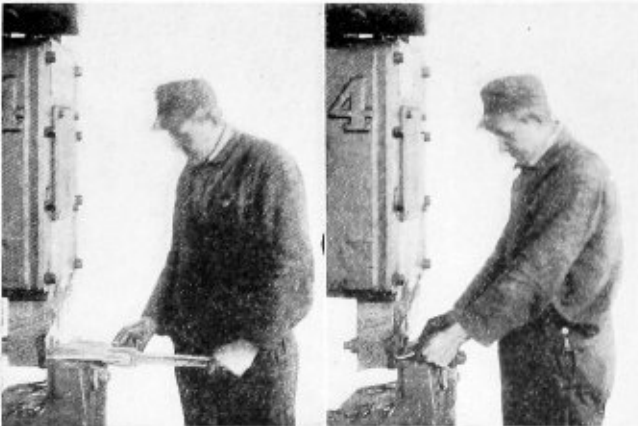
Use a wrench or tongs to hold small plates when being sheared—never hold the plate in the hands
